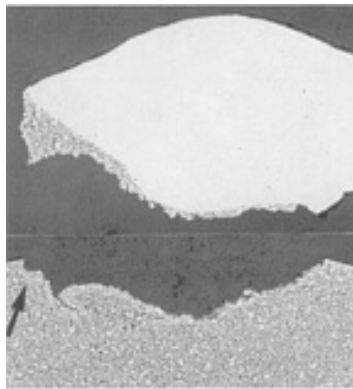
Example of poor weldment design involving GMA welding of F-0000 P/M material ($<6.2 \text{ g/cm}^3$) to AISI 1010 stamping. The unusually large weld bead deposit resulted in a classic toe crack because of high weld metal solidification stresses. Arrow indicates crack initiation site.
